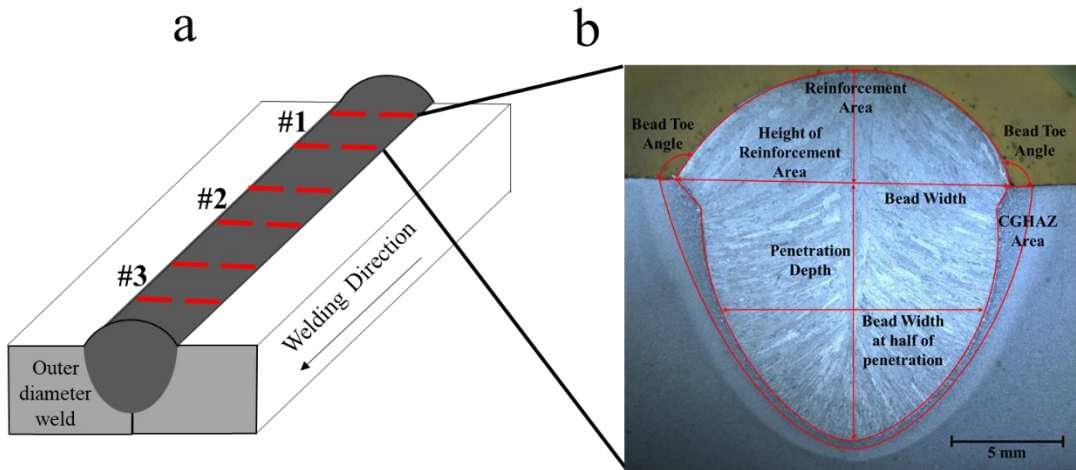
a) Schematic showing sectioning position of welds. b) Macrograph of Sample Test 1-1.
